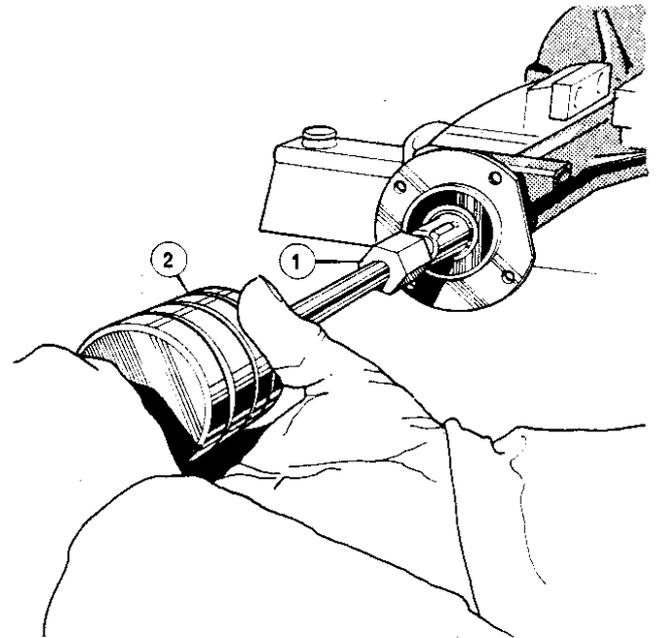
Removing half shaft using slide hammer (axle shown removed from vehicle)
